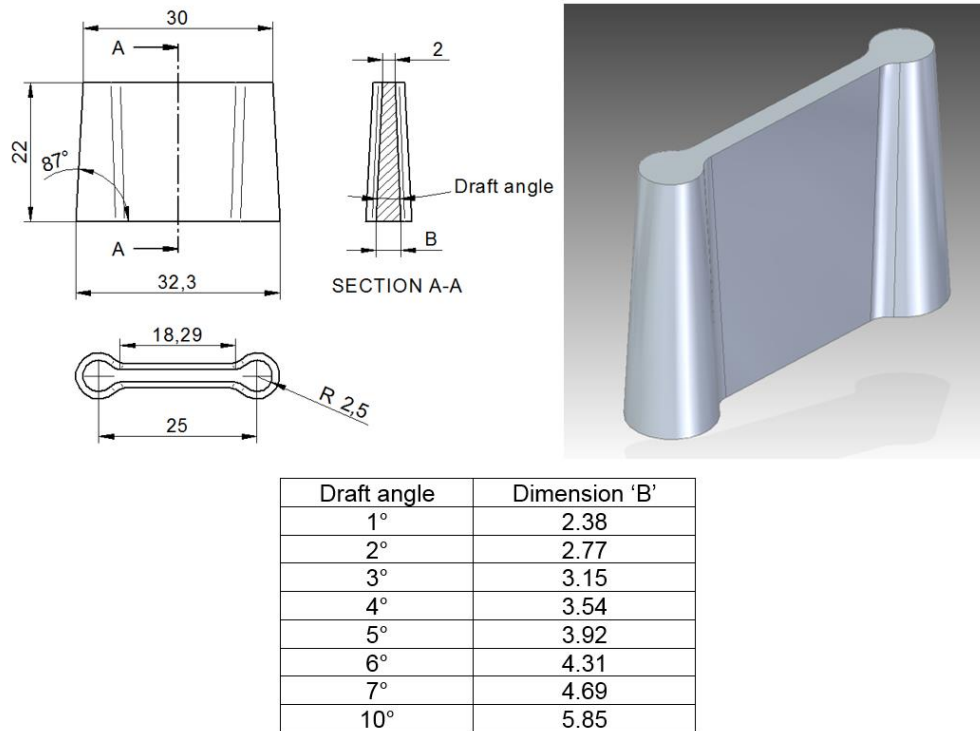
Dimensions and CAD model of the draft angle part used in the draft angle mould experiment.
